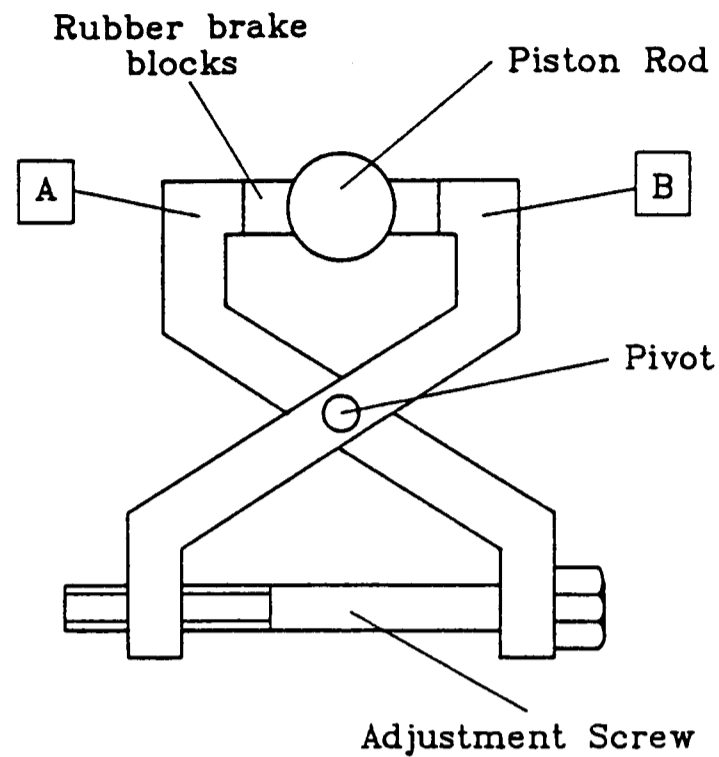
Schematic Drawing of the Friction Brake Assembly
